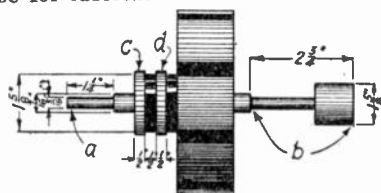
View of the armature core, slip rings and shaft, carrying its drive pulley and with the shaft ends reduced in diameter as shown.
